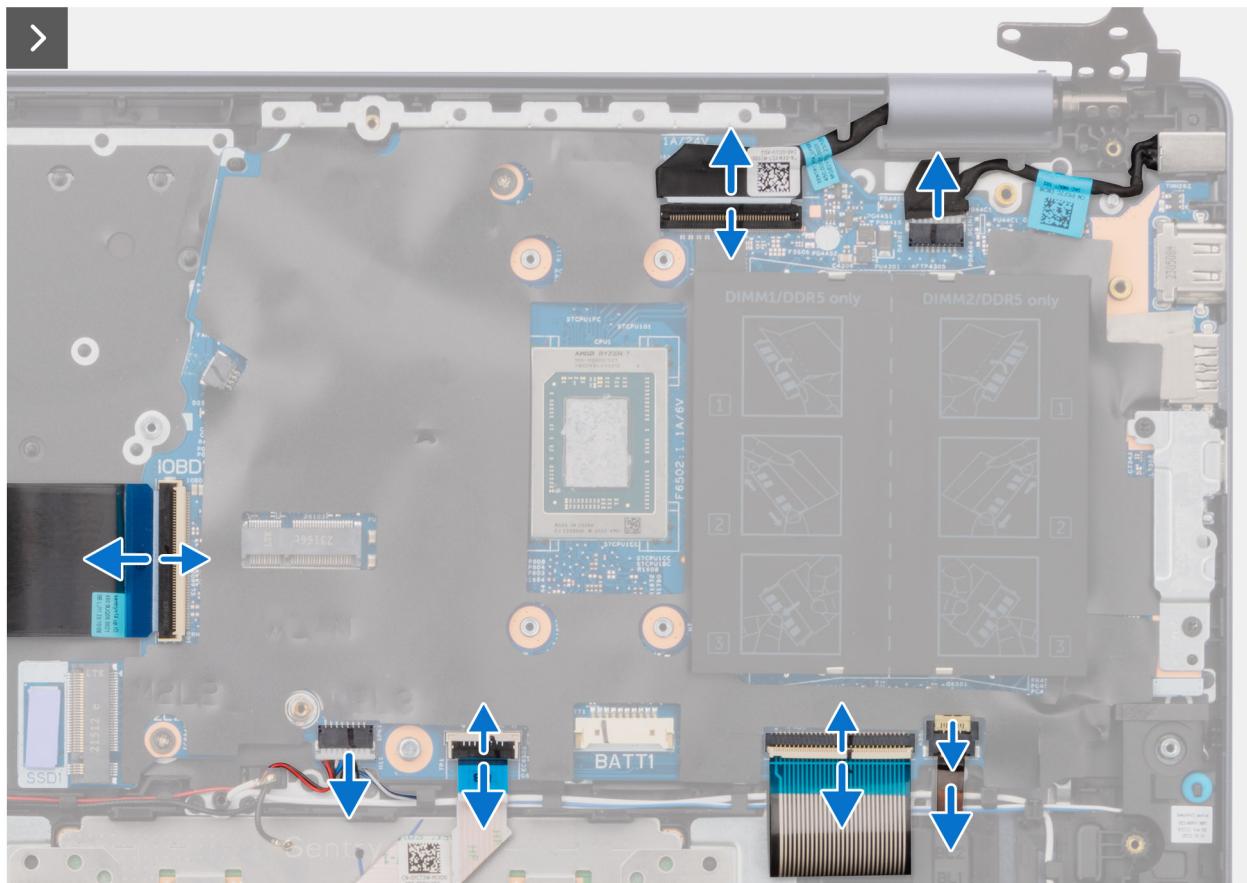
Removing the system board (for computers shipped with an aluminum chassis)
